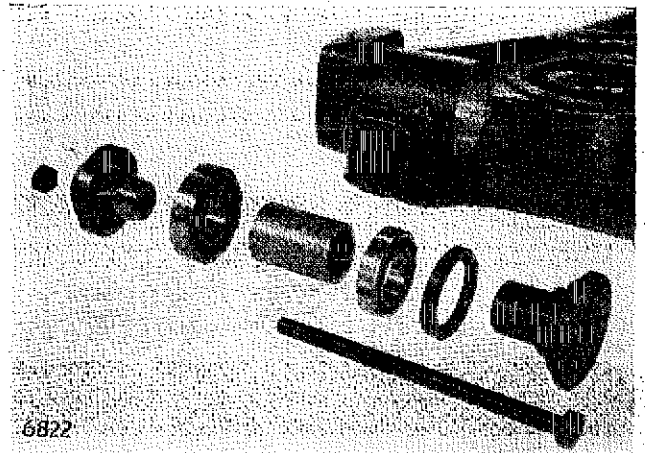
Rear hub showing assembly of Tool No. RG.379
